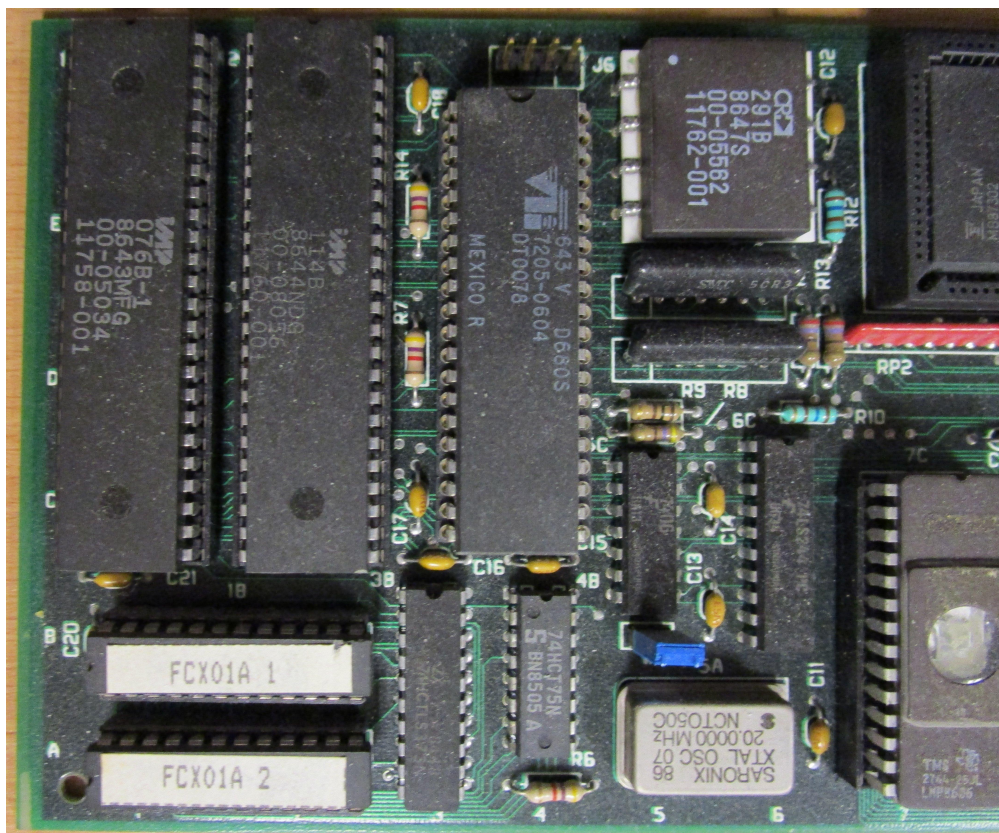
Unidentified 3.5-inch hard disk ISA card, left front closeup
